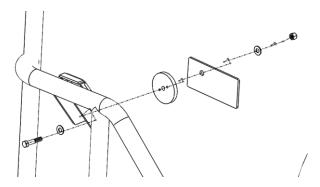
Center Mount Hardware Assembly (No Door Shown)
